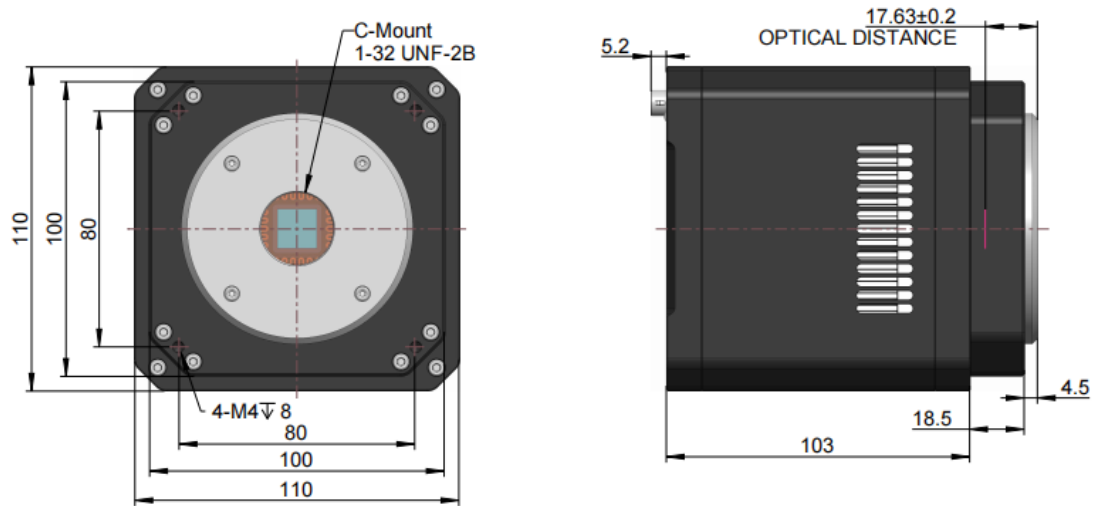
MaxCam-2020UV-TE dimensions (mm)
